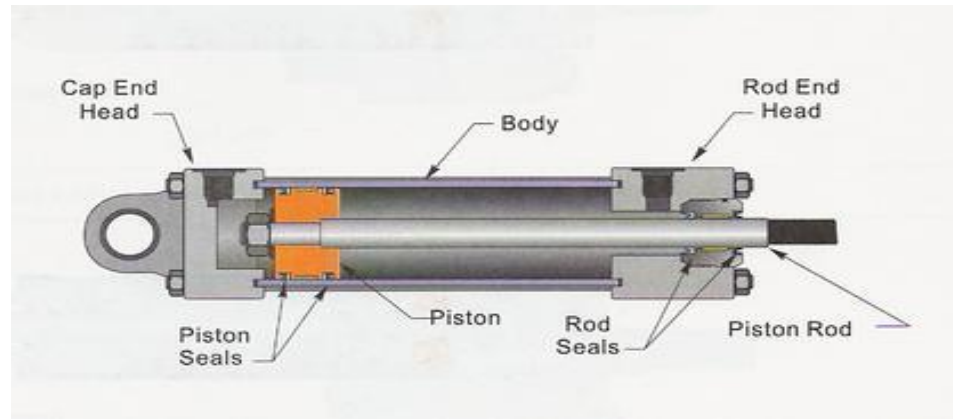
Main Parts of Hydraulic Cylinder (5)
